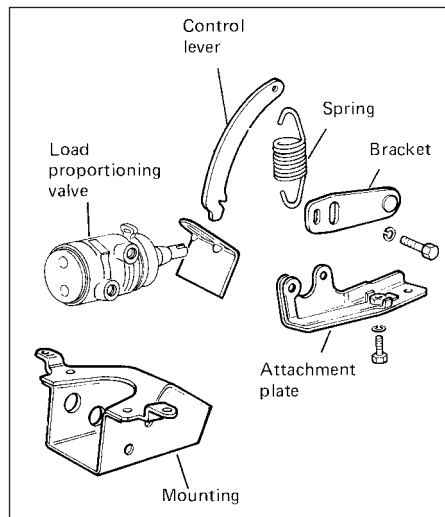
Components of the pressure regulating valve (Sec 10)
